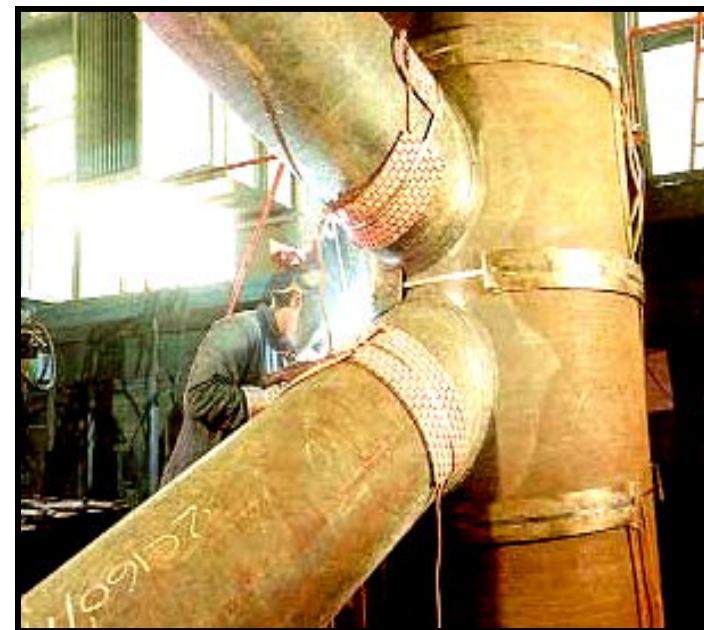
Preheating with electrical thermal pads. This method offers more precise control of temperature. (Courtesy TWI, UK).
